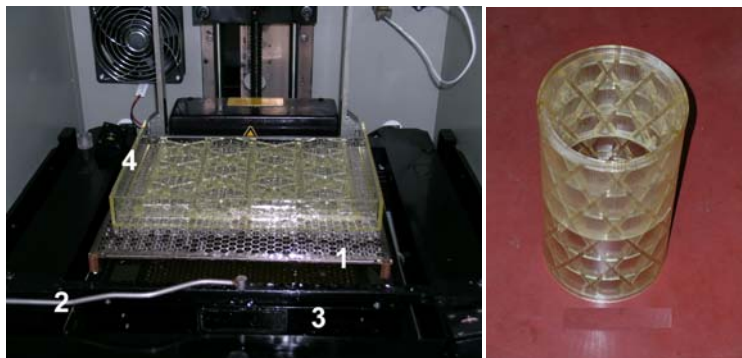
rapid prototyping of the positive moulds (flat and cylindrical)
